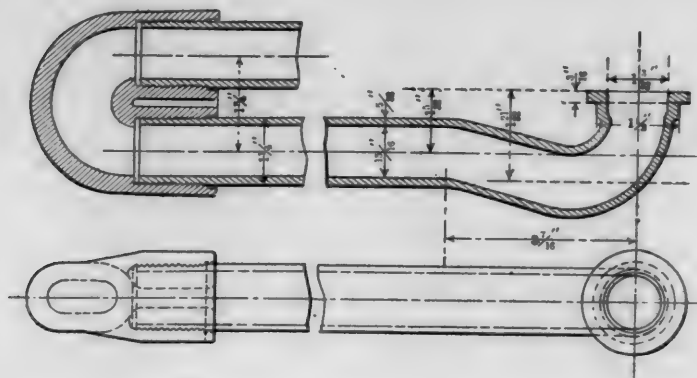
SUPERHEATER TUBES, SHOWING UPSET END AND CONNECTION TO RETURN BEND.
